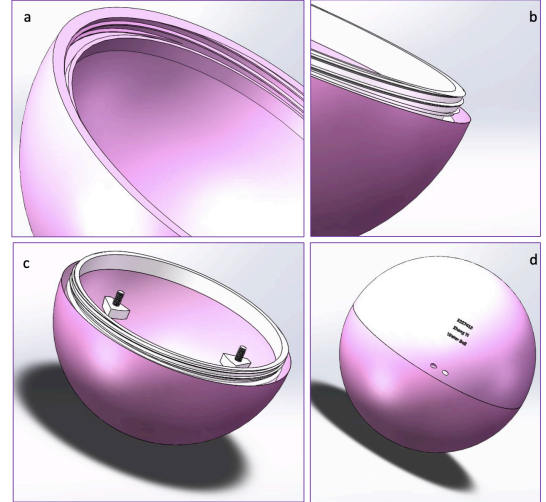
Features of joint design: (a) the screw threads and groove of the upper hemisphere; (b) the screw threads of the lower hemisphere; (c) capture of the lower hemisphere; (d) capture of the complete assembled ball.
